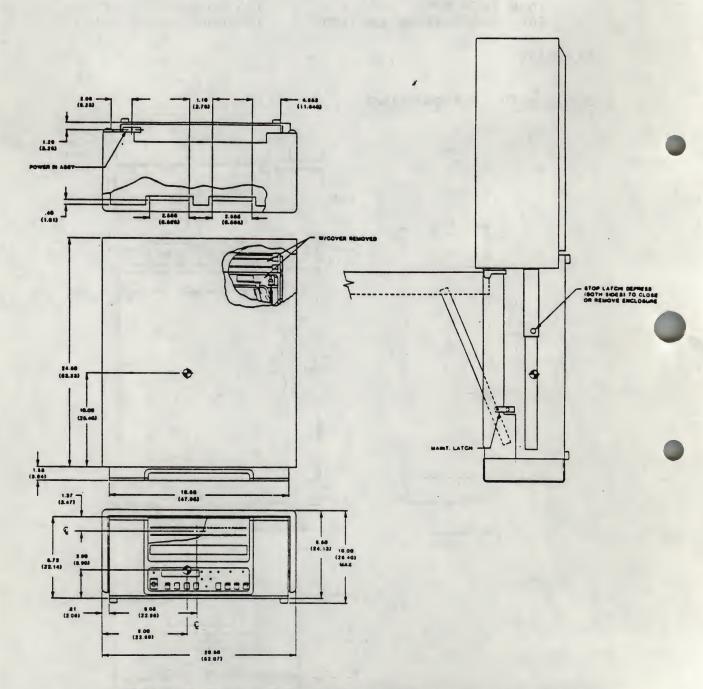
9660 PHYSICAL DIMENSIONS - STAND ALONE
